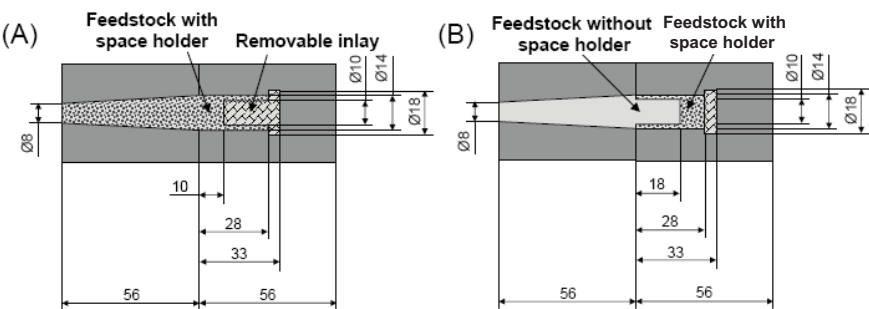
Dimensions of one of the geometries produced by 2-C-Insertion-MIM with the small cylinder mould. (A) Green part produced with the removable inlay. (B) Inlaid green part in the mould.
